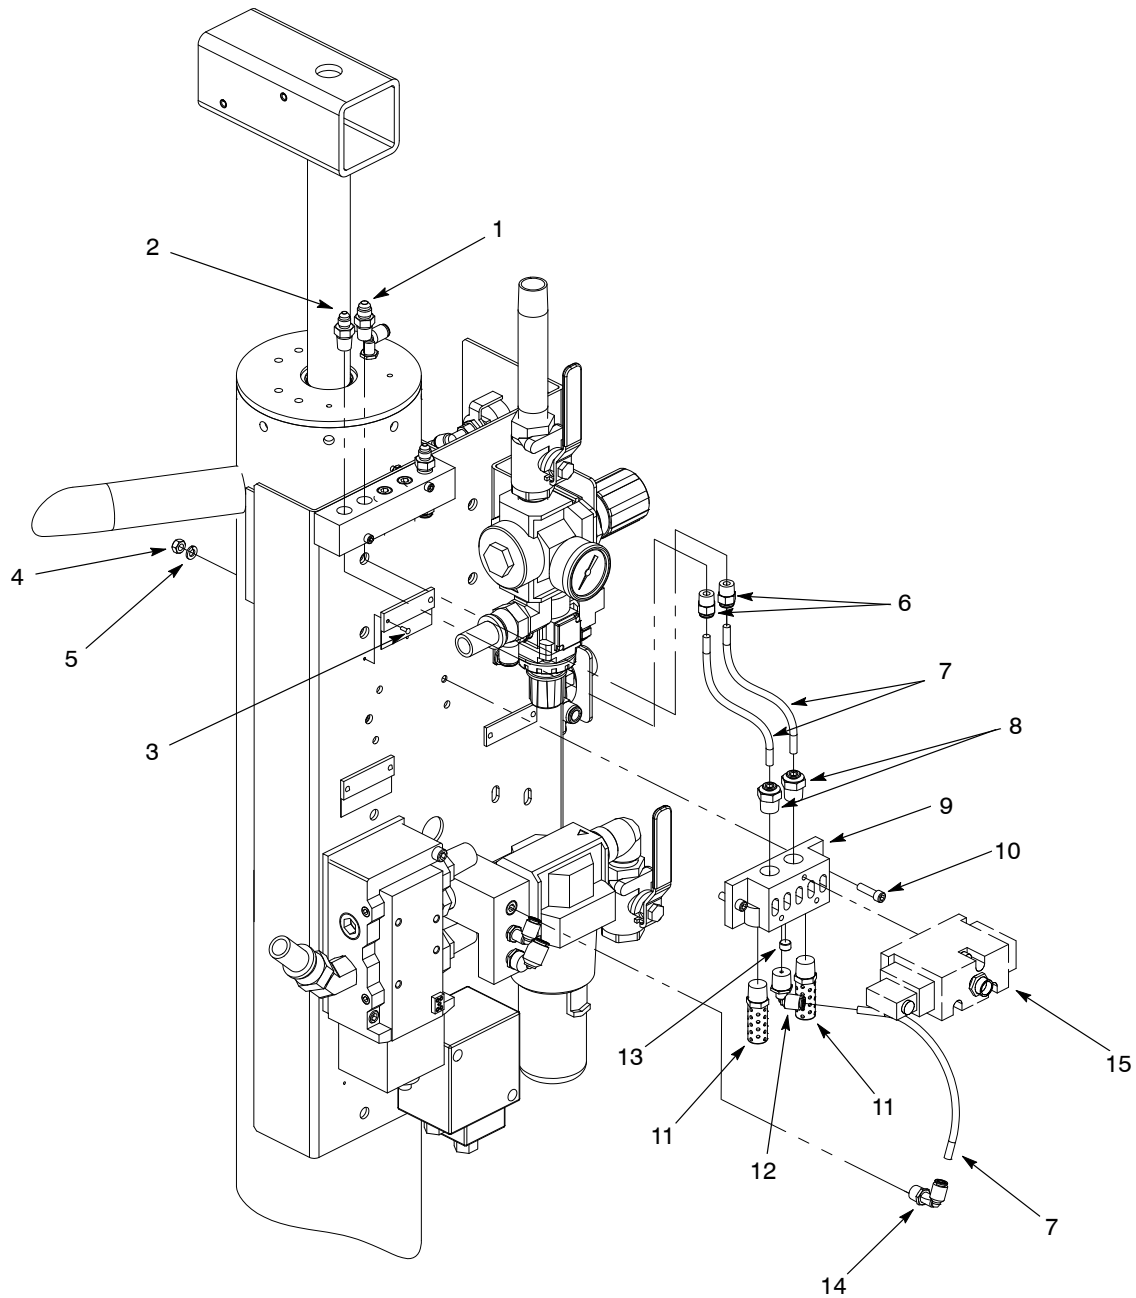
24 Vdc/120 Vac Automotive 125 Series Valve Base without DeviceNet I/O Block Cable
